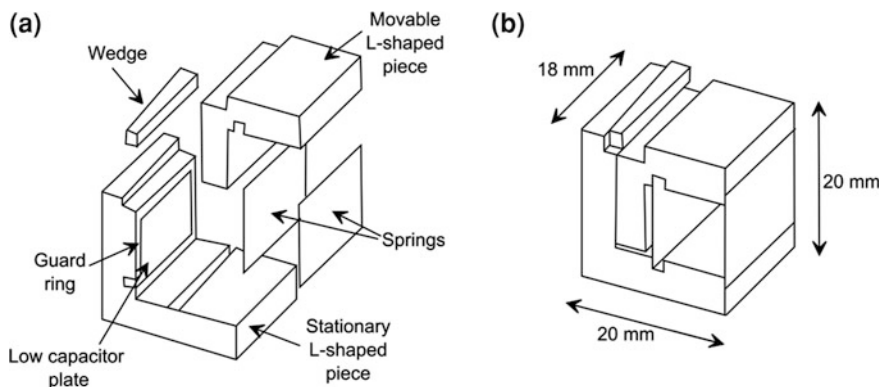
a Exploded view of the fused quartz dilatometer; b Assembled view of the cell [11]
